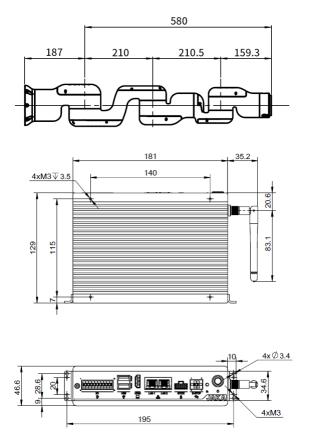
Overall Dimensions of JAKA Mini Series Robot and Minicab controllers
